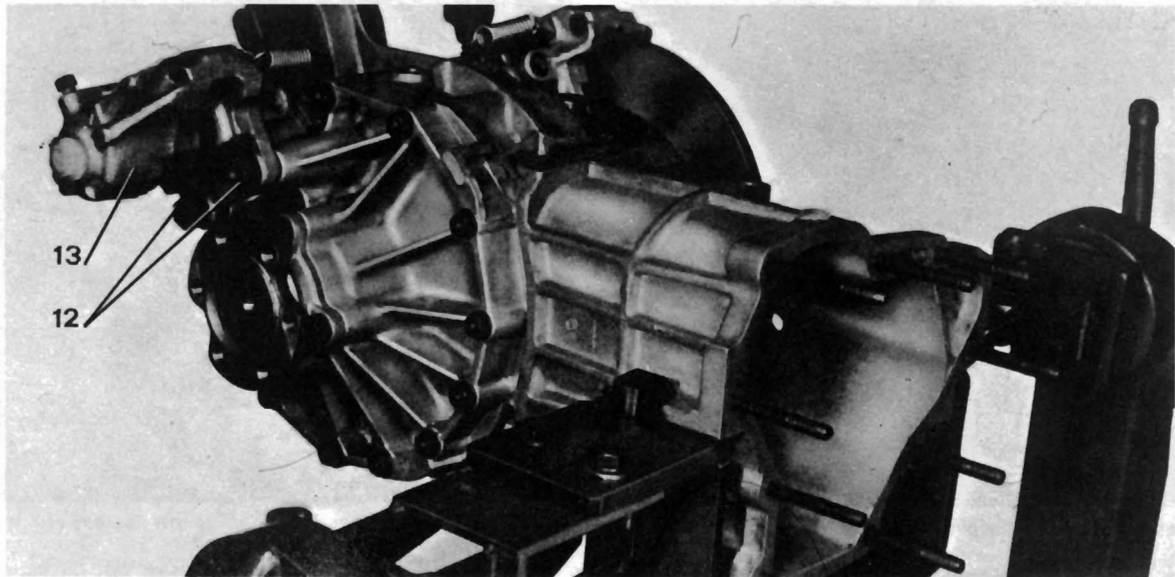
Caliper securing nuts (12) and caliper (13) (Sec 10)
